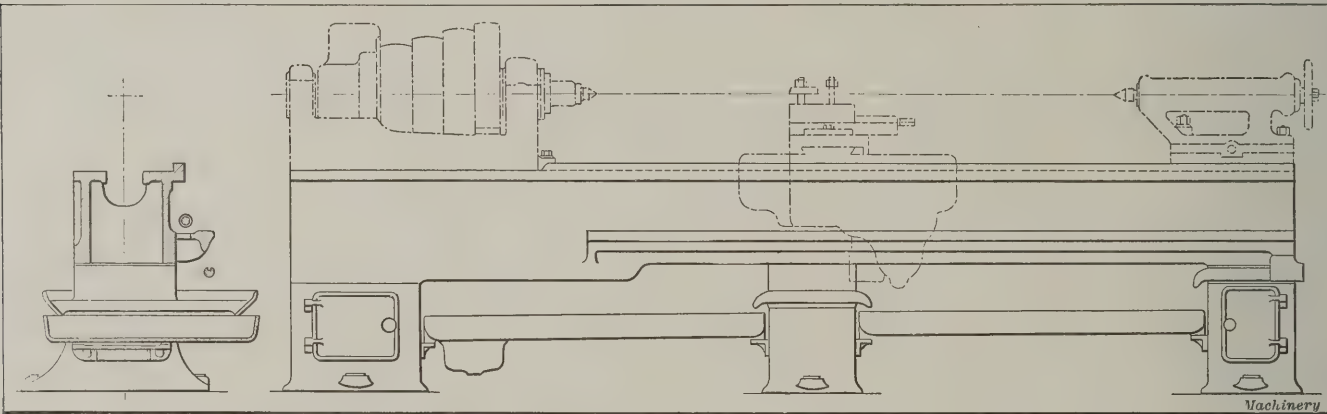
High-speed Lathe Bed with Three Supports, as built by Darling & Sellers, Ltd., Keighley, England
